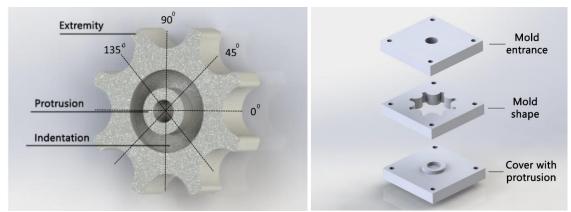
Steering wheel casting. Left, the simplified cast. Right, mold design.
